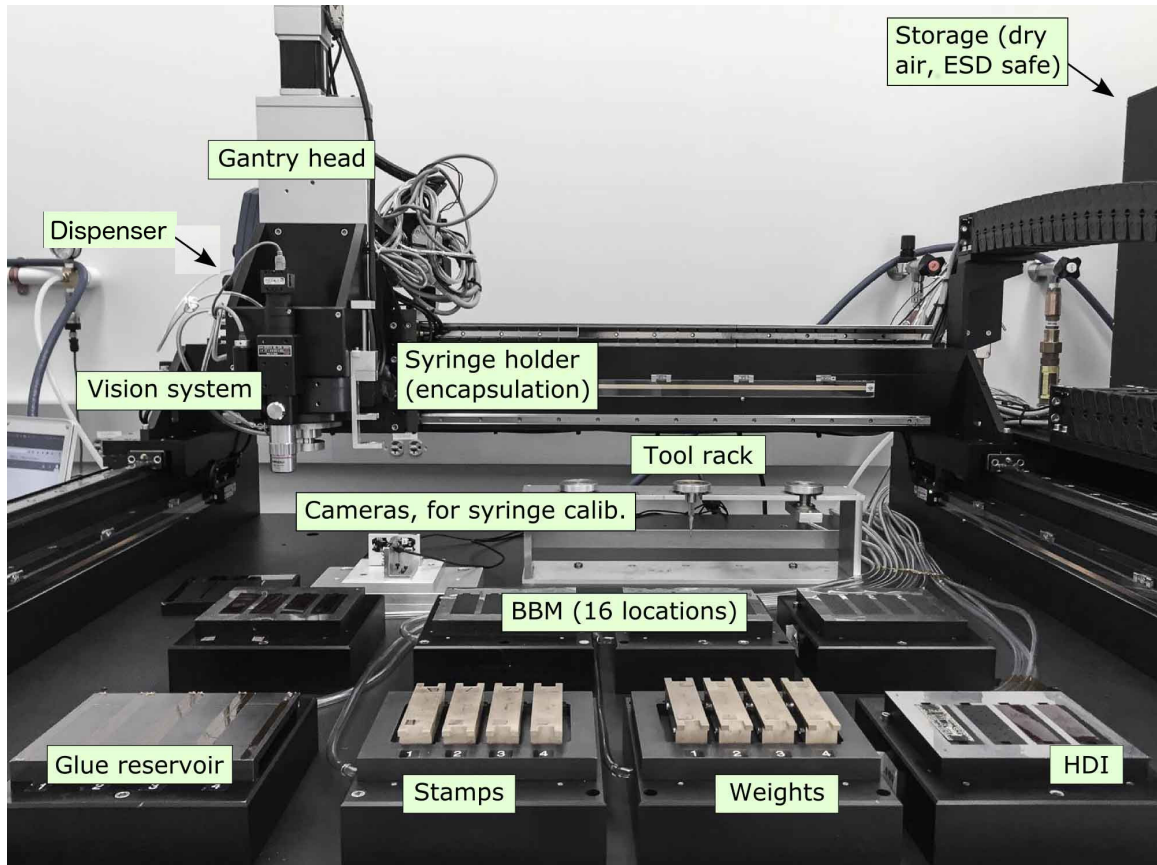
The gantry, shown equipped with the tooling used in module assembly.
